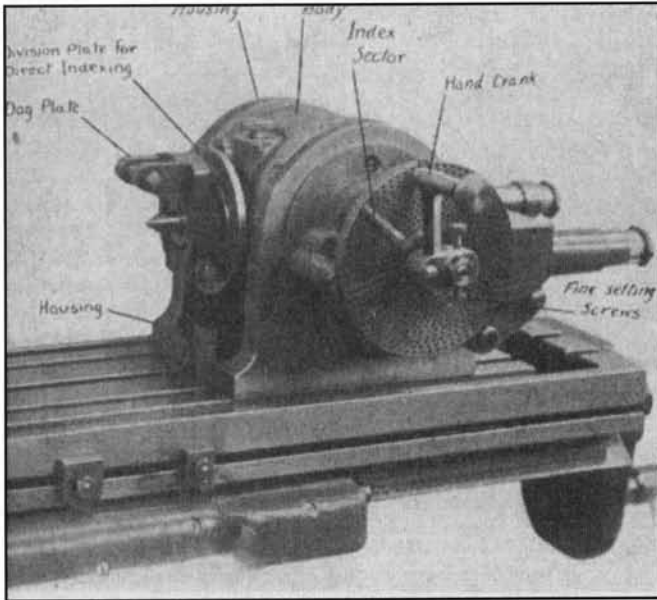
A front view of the "Parkson" dividing head, set for plain indexing.
